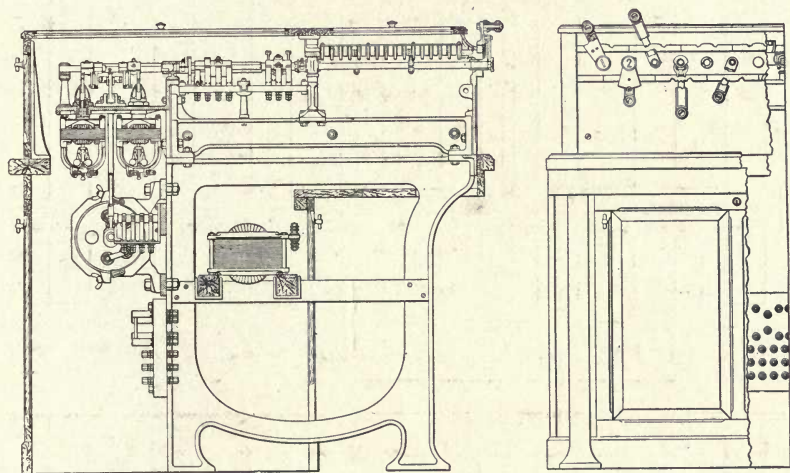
VIEWS OF ELECTRIC INTERLOCKING MACHINE SHOWING END AND FRONT ELEVATION
